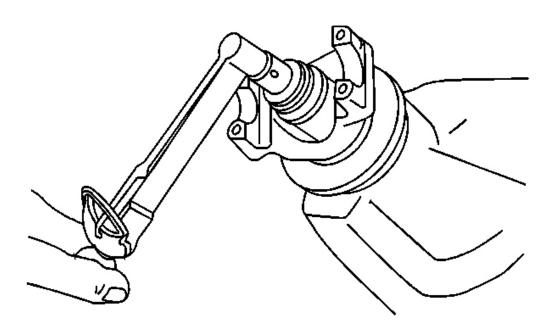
Measuring Pinion Rotating Torque Courtesy of GENERAL MOTORS CORP.
